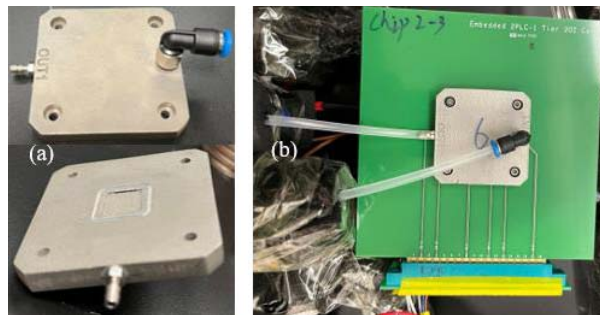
(a) 3D printed manifold (EOS M 290, EOS Stainless Steel 316L). (b) Testing sample with manifold.
